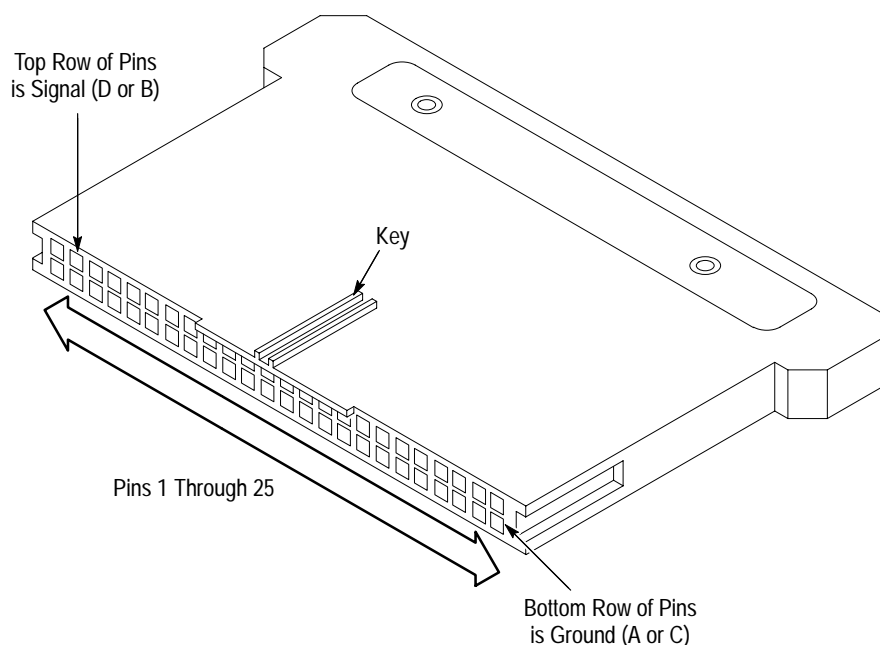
Coaxial Probe Cable Header Pin Orientation
